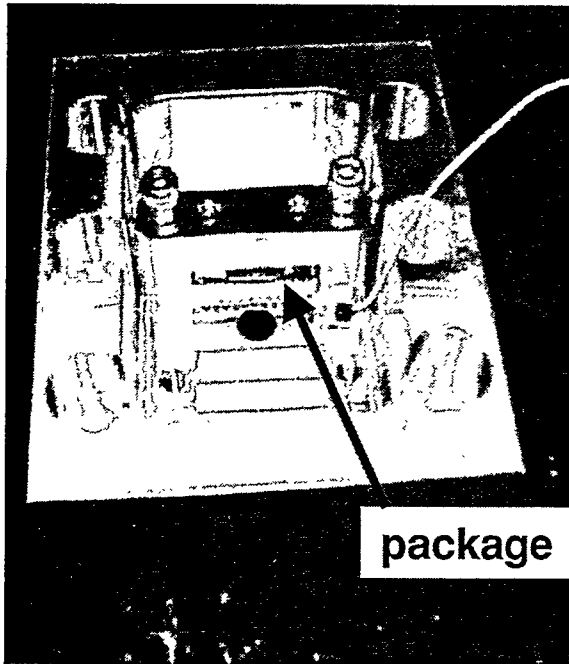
This fixture clamps up to four packages for the shock table tests.
